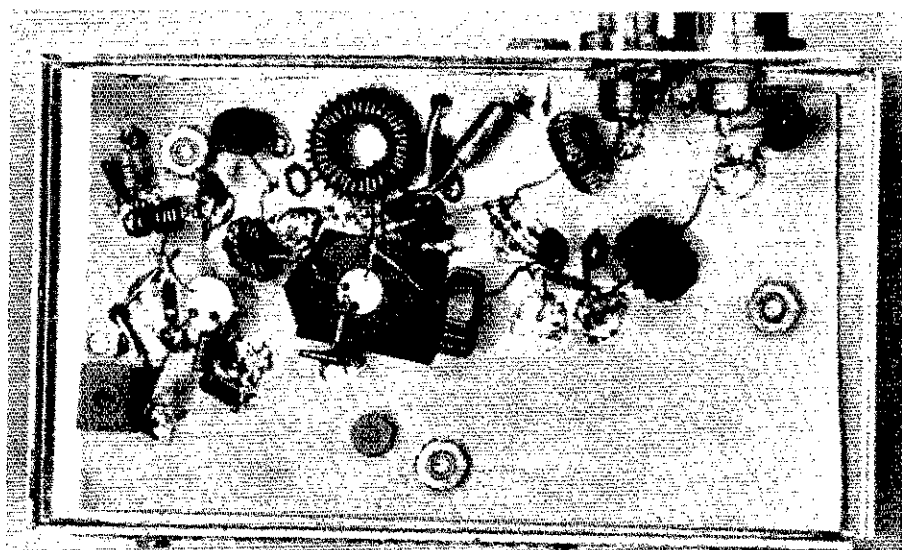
Photograph of the driver and PA assembly. Drive control R1 is visible at the lower left.
